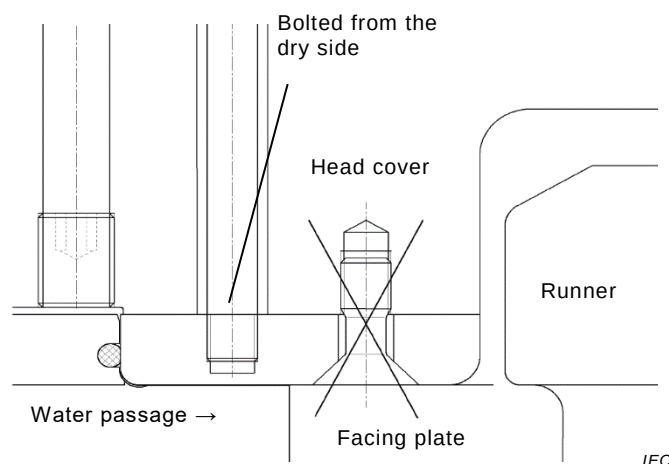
Example of fixing of facing plates from the dry side (bolt to the left)
